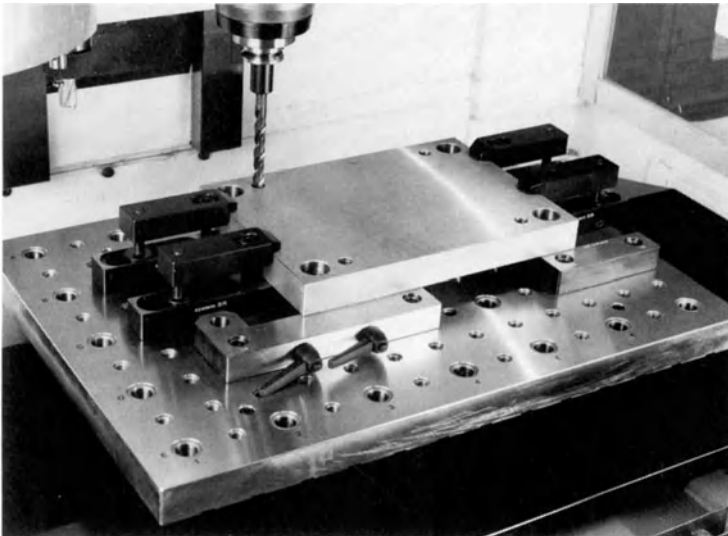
A part setup on the precision fixture which is left permanently in situ on the table and accessories are quickly added when the workpiece geometry changes. [Courtesy of System 3R International.]
